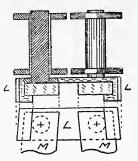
Full-size Details of Clip, Cores, Bobbins, and Magnet-poles
